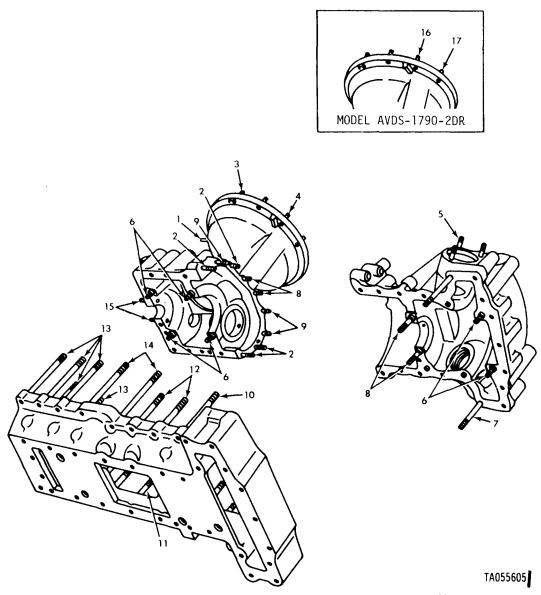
Rear fan and accessory drive housing and base studding assembly.
